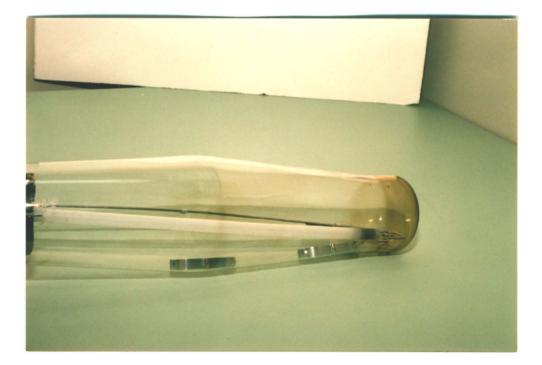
A Lamp Failure At Outboard End (Single Arc Tube Support)
